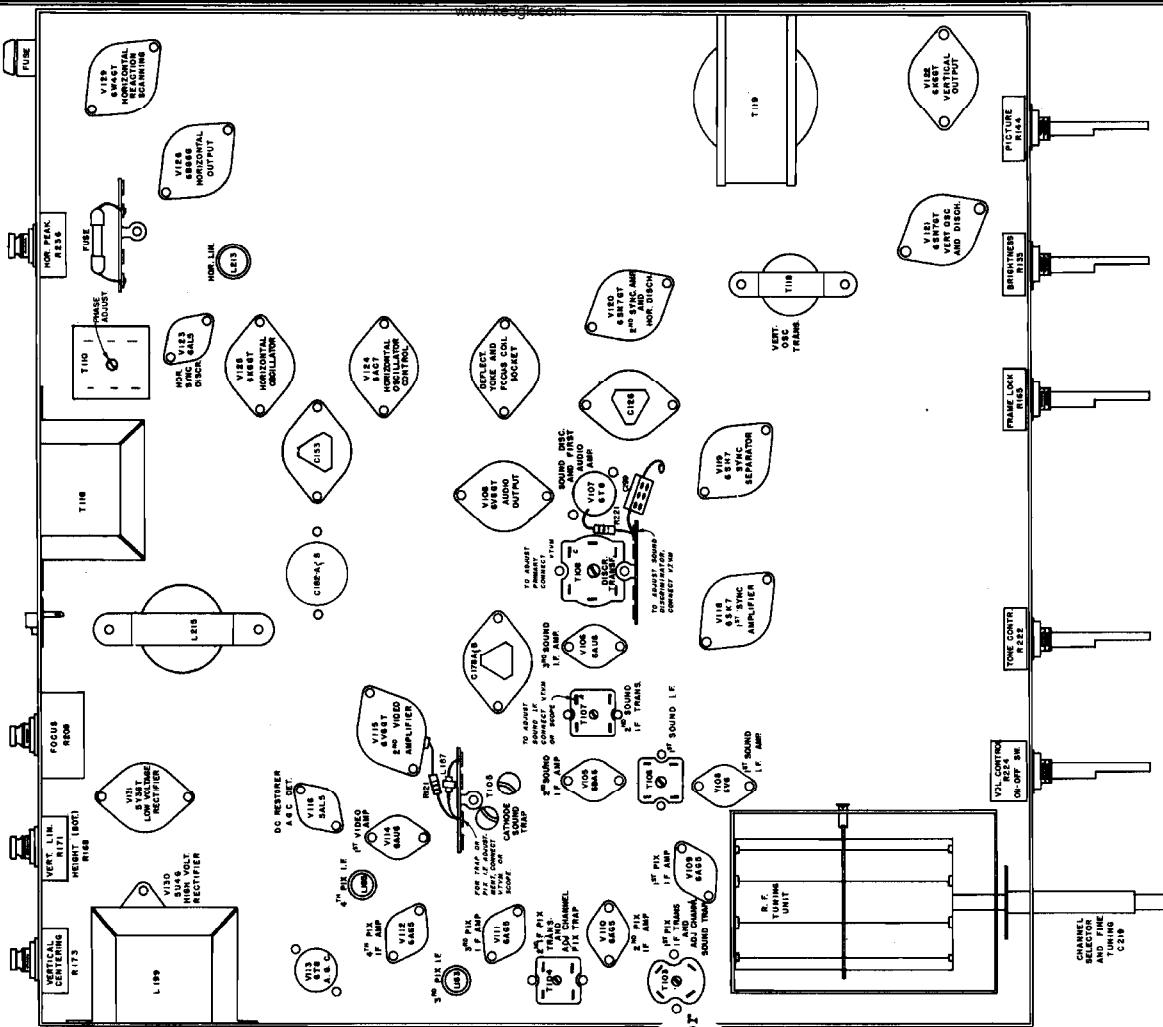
CHASSIS BOTTOM VIEW MODEL 55, 56
